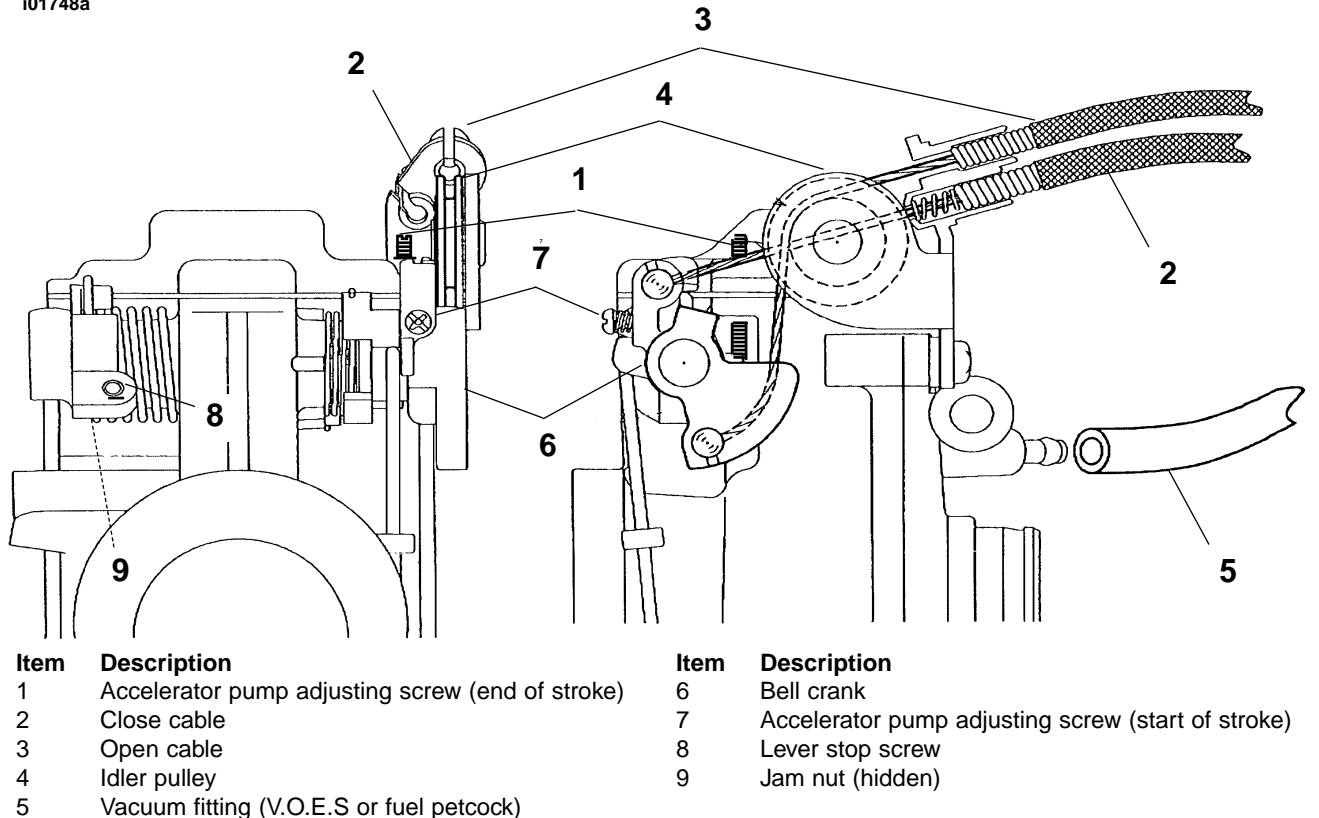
Front and Side View of Throttle Cable Routing (including VOES)
